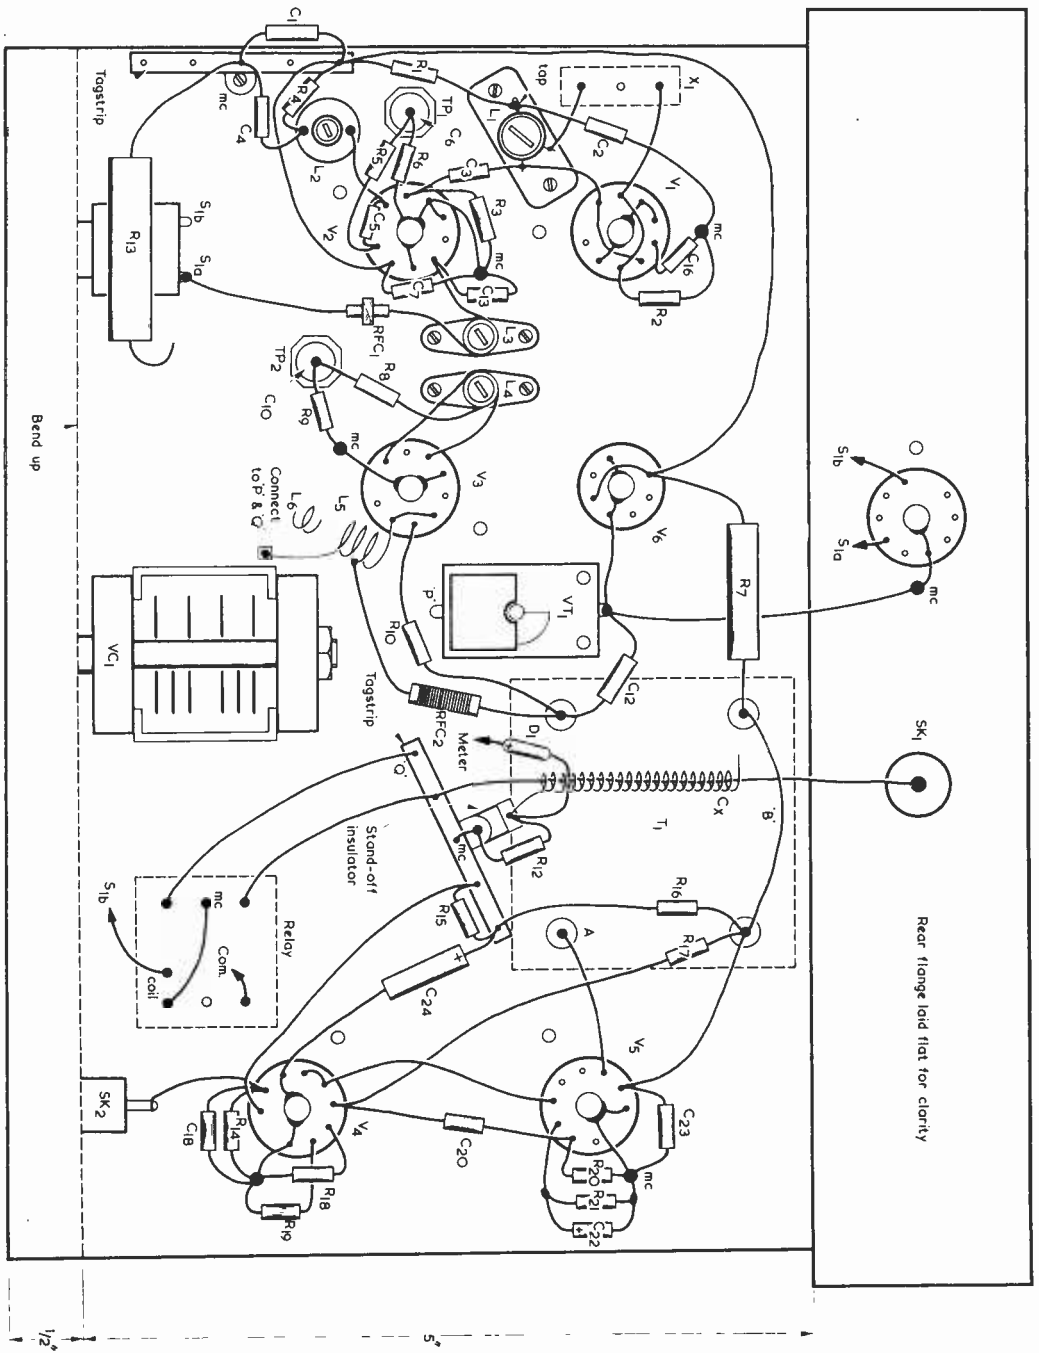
Layout and wiring of the major components below the chassis. Check, against Fig. 1, that the relay tag positions correspond with those shown here before wiring up to this component
